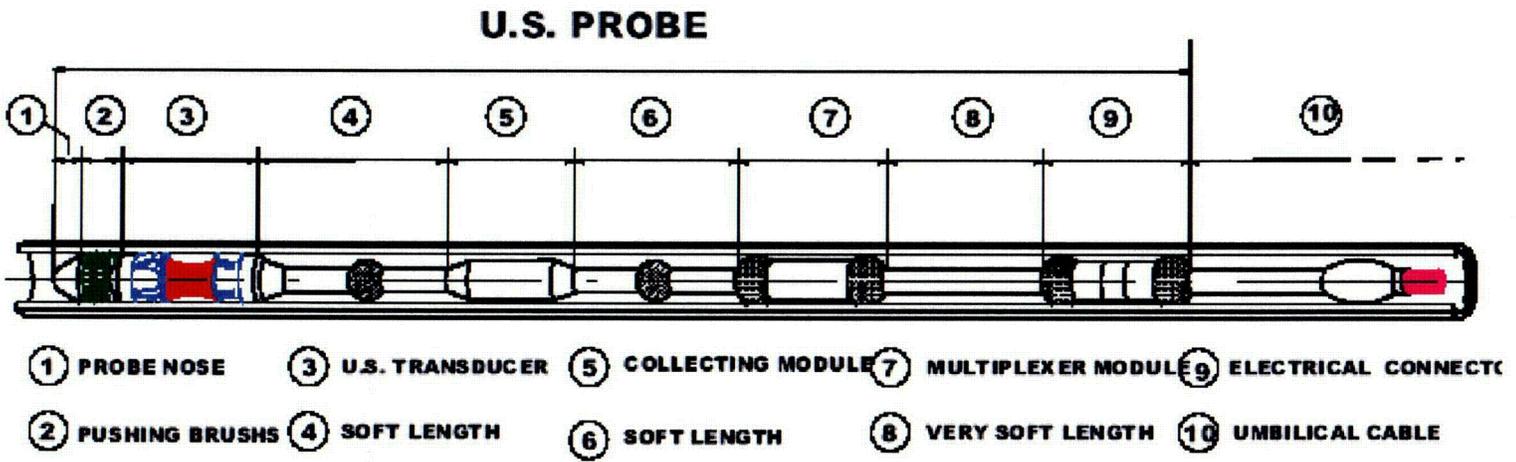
Helical Coil Steam Generator Inspection System
